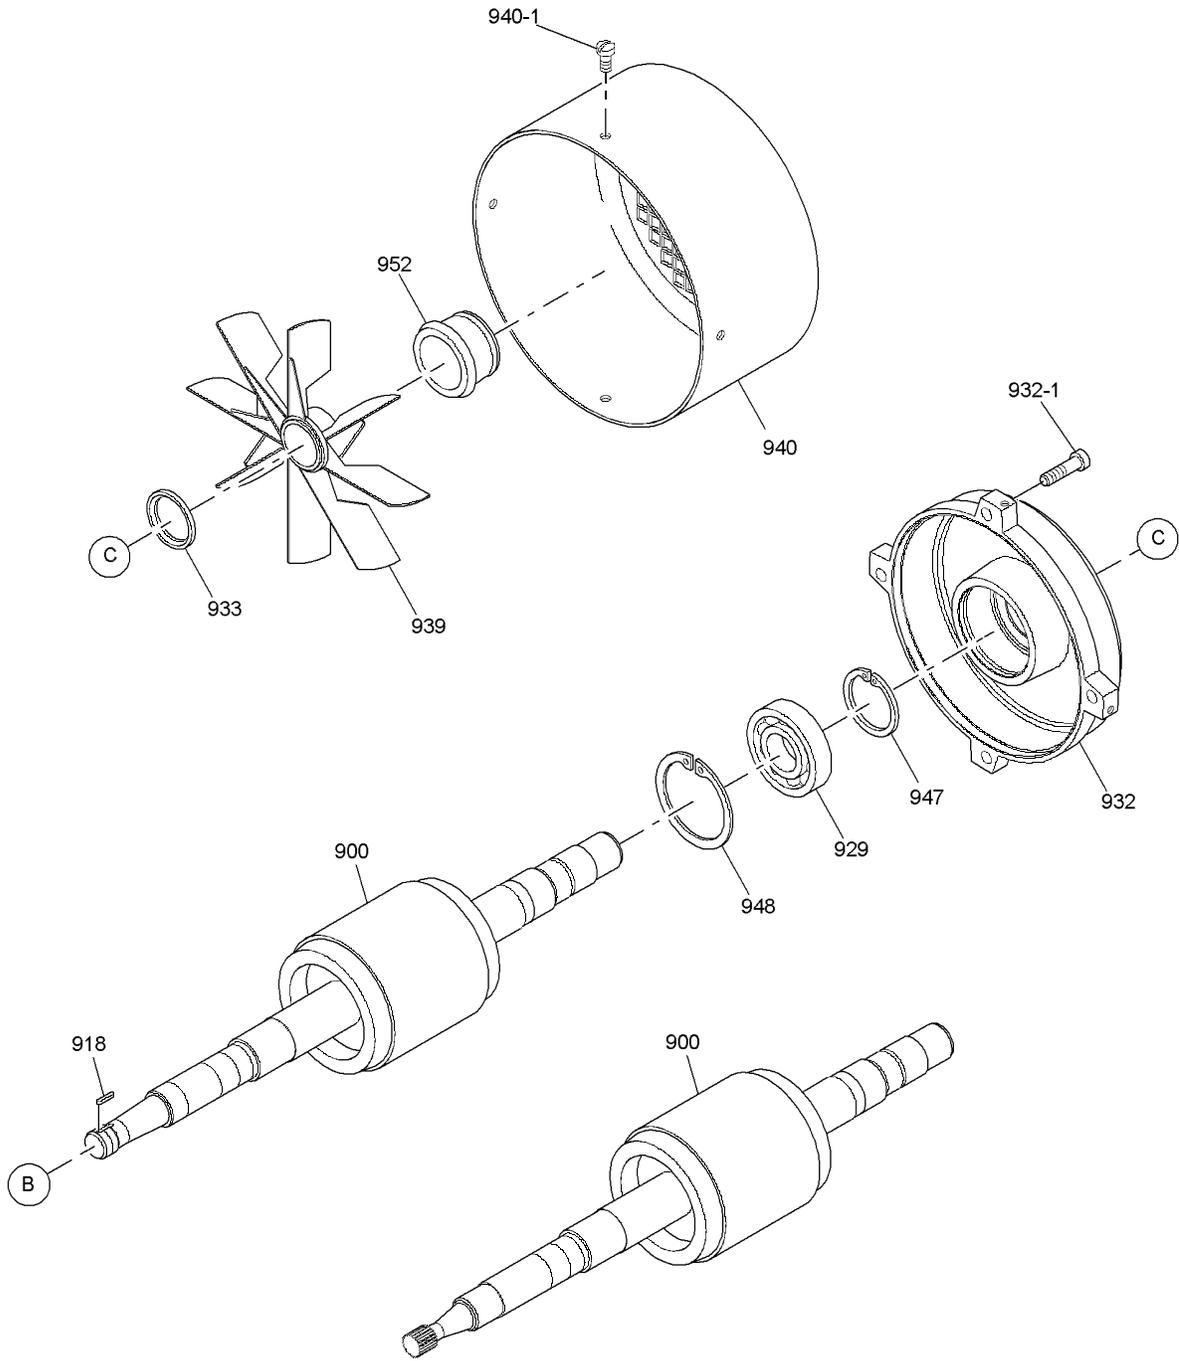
General Motor Exploded View and Generic Parts List (Sheet 2 of 2)
